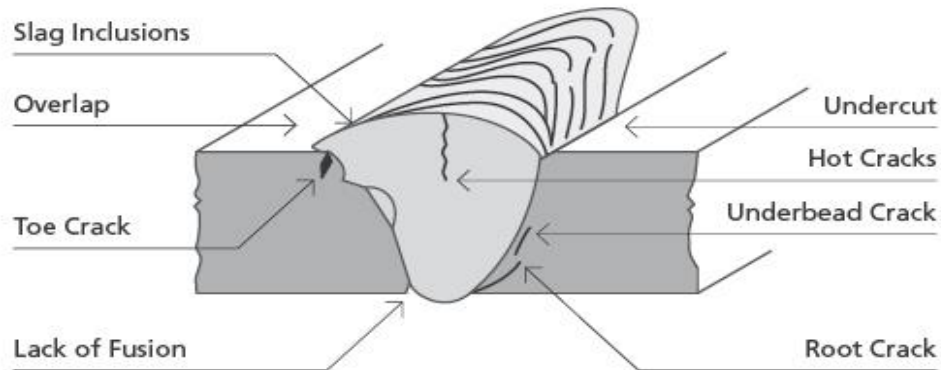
Sections of Weld Defect (Khanna, 2005)
